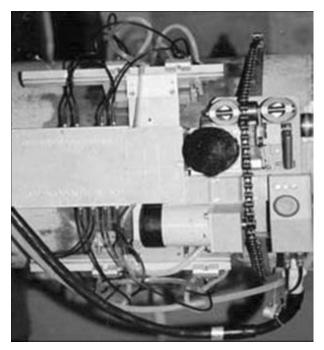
System AVGUR 5.2 for automated ultrasonic testing of circumferential butt welded joints of pipelines of WWR-1000 reactor primary coolant circuit
